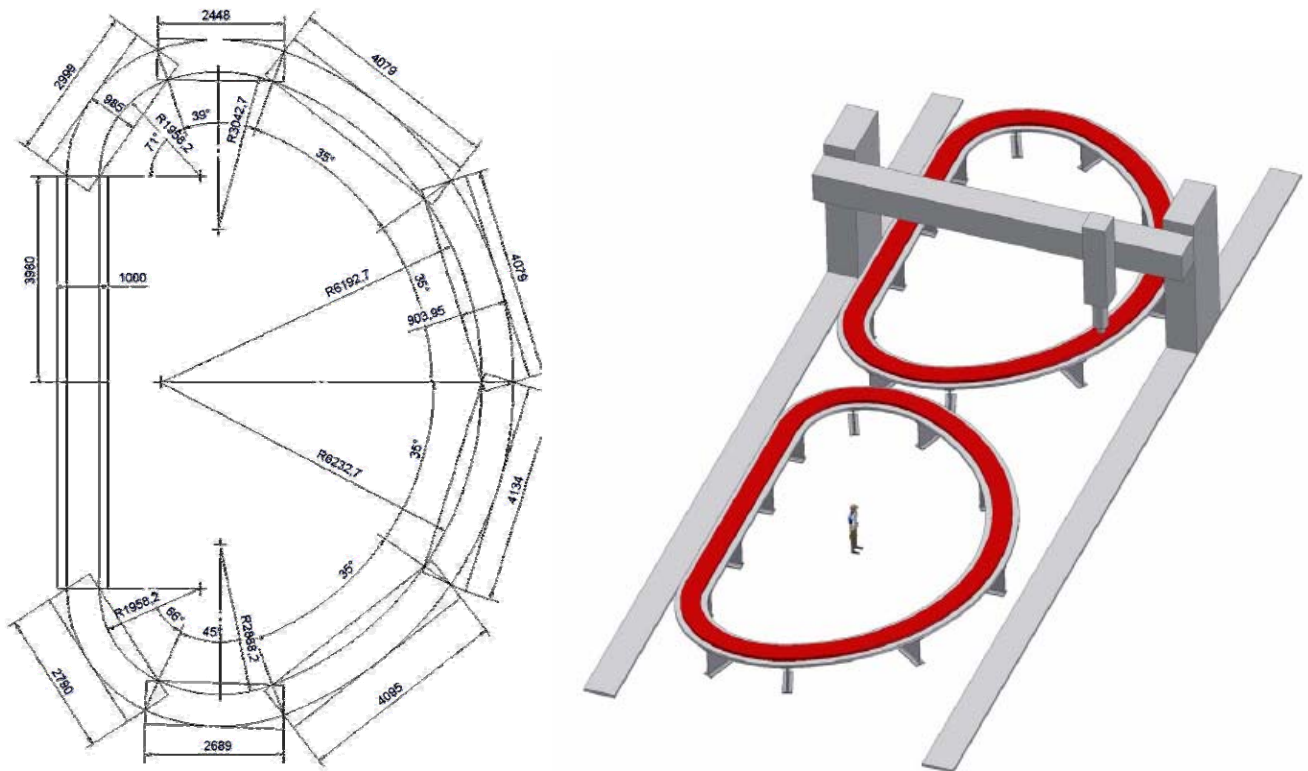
Concept 2: Not machined small segments are TIG welded. Machining of surface and grooves on large machine.
